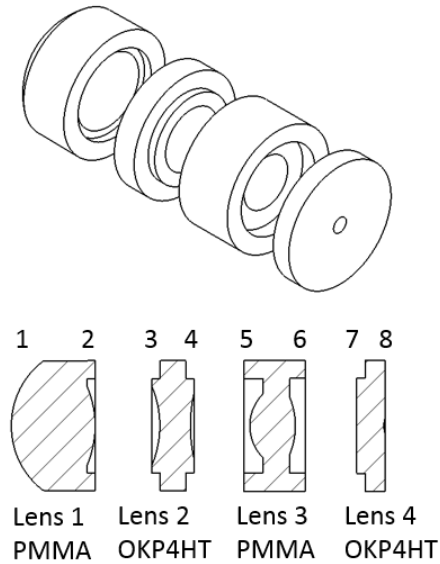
Modified microscope objective design considering integrated mechanical mounts.
